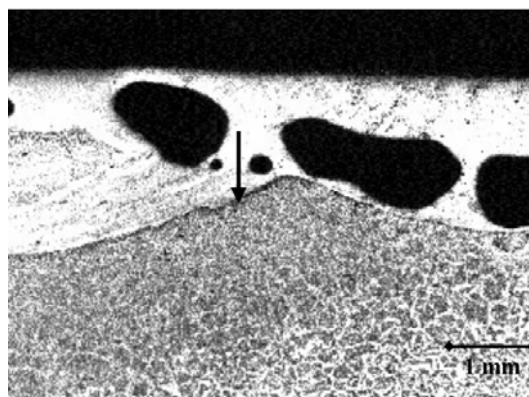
[9]. Blow holes in padding weld DIPS143 (bucket tooth). The arrow points at the local lack of weld penetration. Etch. 3%  $\text{HNO}_3$
